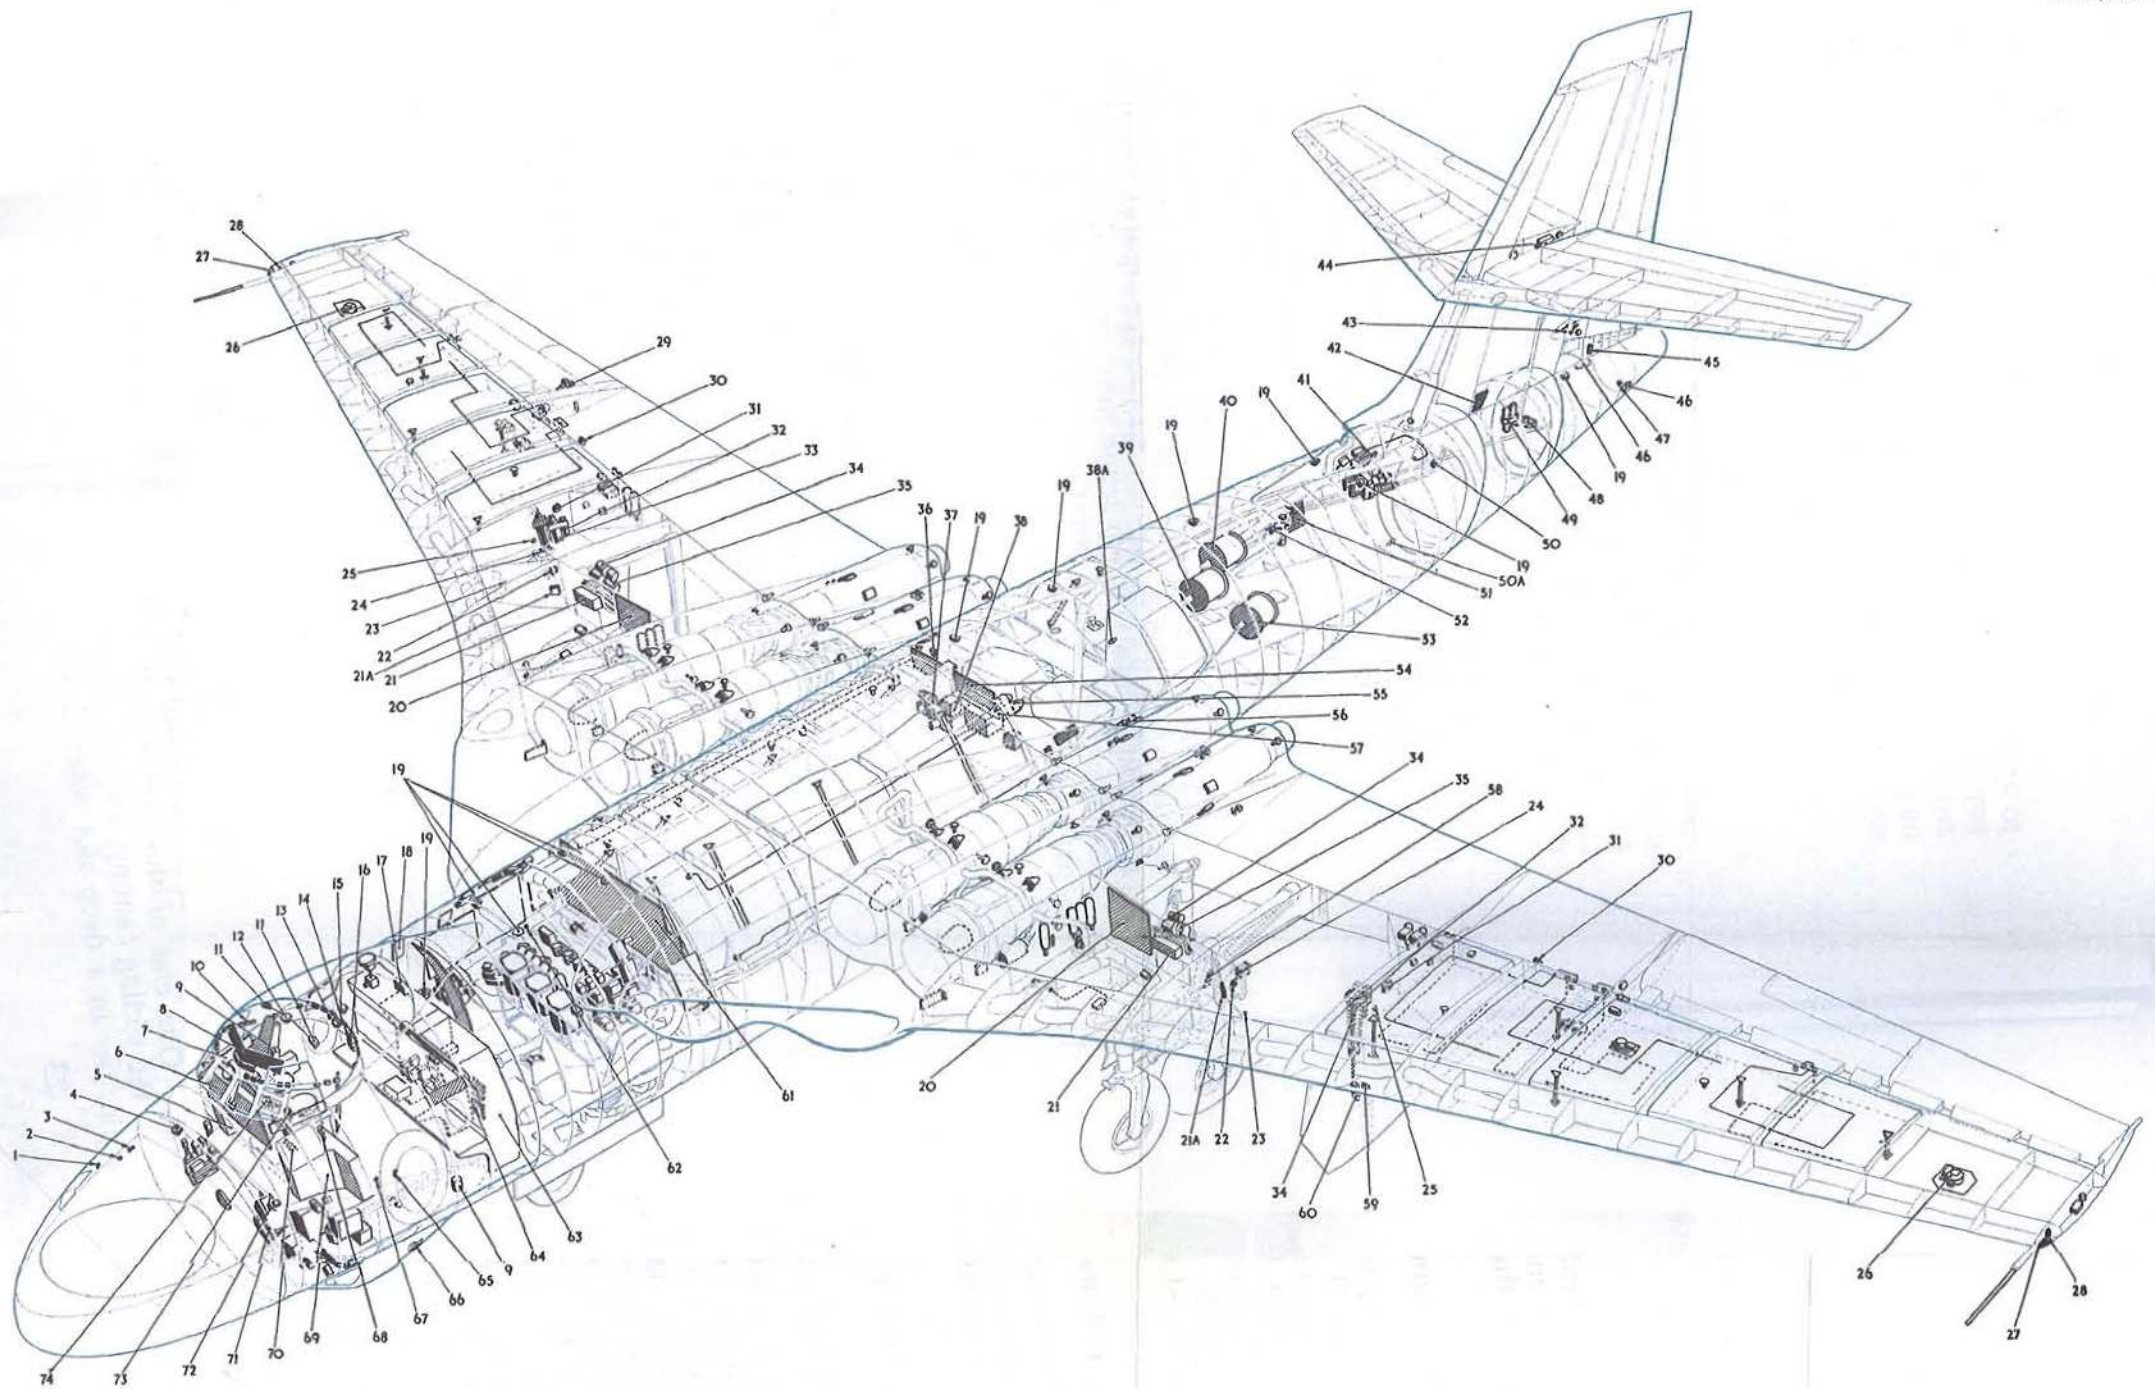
Location of equipment (B Mk.I and B(PR) Mk.I)
